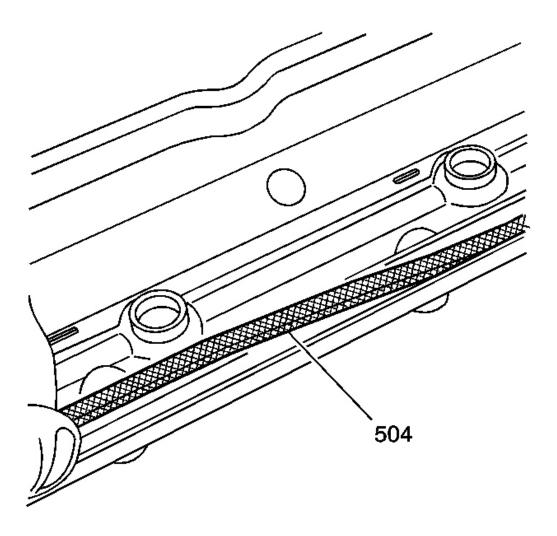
View Of Valve Rocker Arm Cover Gasket Courtesy of GENERAL MOTORS CORP.
